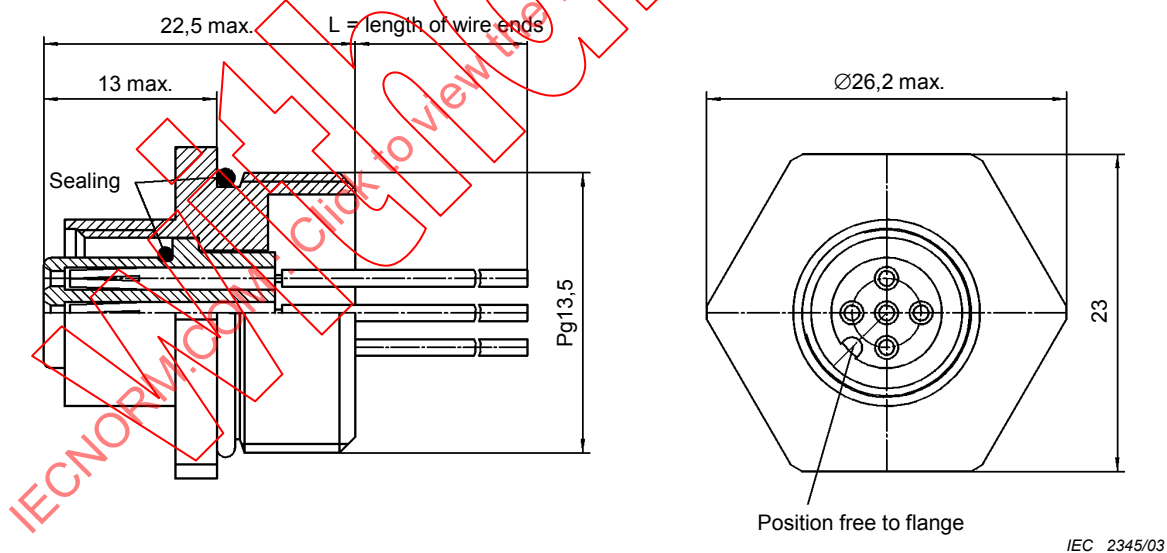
Fixed connector, with wire ends, single hole mounting Pg13,5, female contacts
